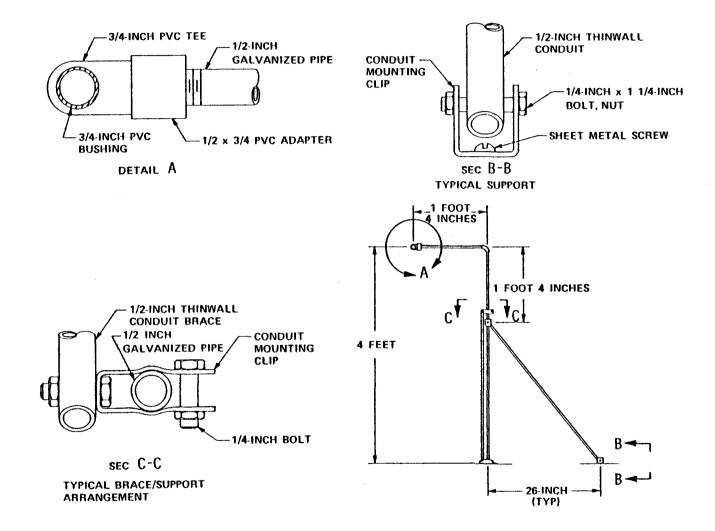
SPRAY TUBE SUPPORT ASSEMBLY
